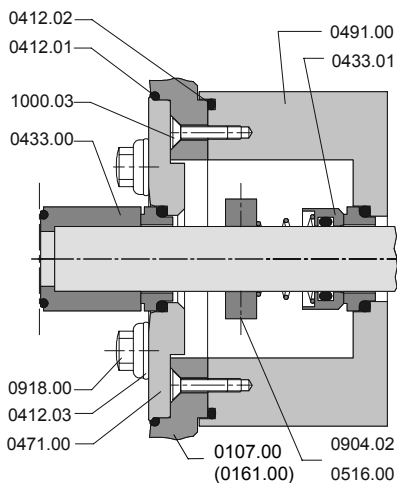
Double mechanical seal, tandem, with sterile mechanical seal.
